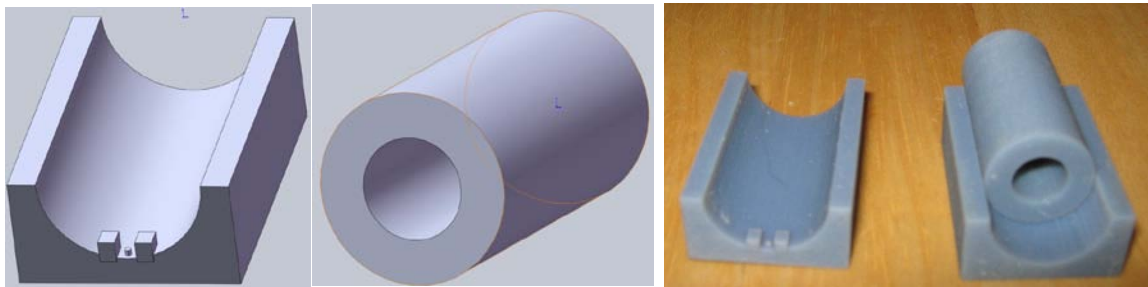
Design and rapid prototyped cylinder and mold calculated to produce 5% camber in the manufactured titanium hawkmoth wing
